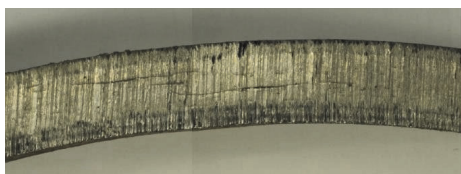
Section of the spool in a zone where defects are evident at the naked eye (courtesy of EniProgetti).
